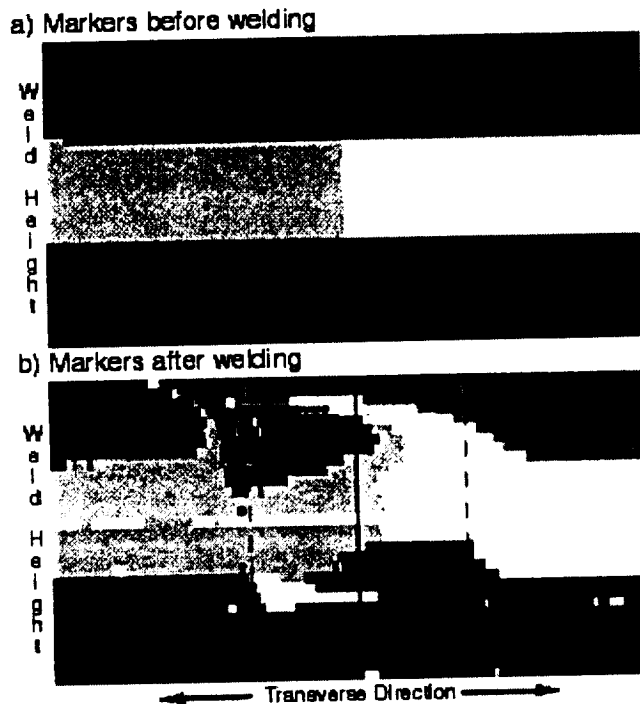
Vertical mixing in Weld 38 (0.61 mm/rev). The markers are projected in the vertical plane viewing in welding direction. (a) shows the undeformed markers before welding and (b) shows the vertically mixed six markers after welding. The solid and the dashed lines denote the centerline and the pin diameter, respectively.
